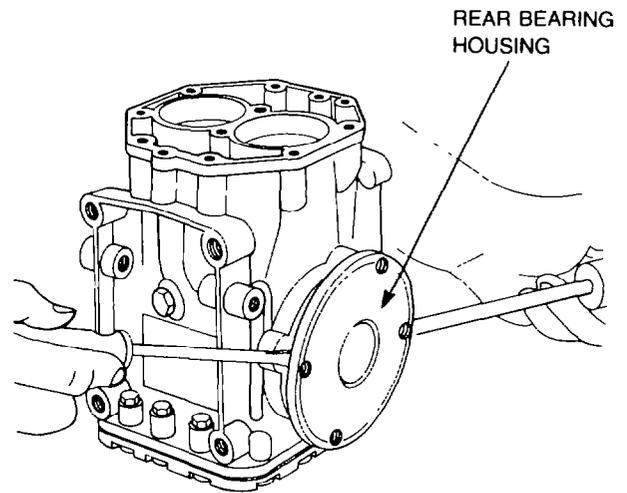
Crankshaft Rear Bearing Housing — Removal
